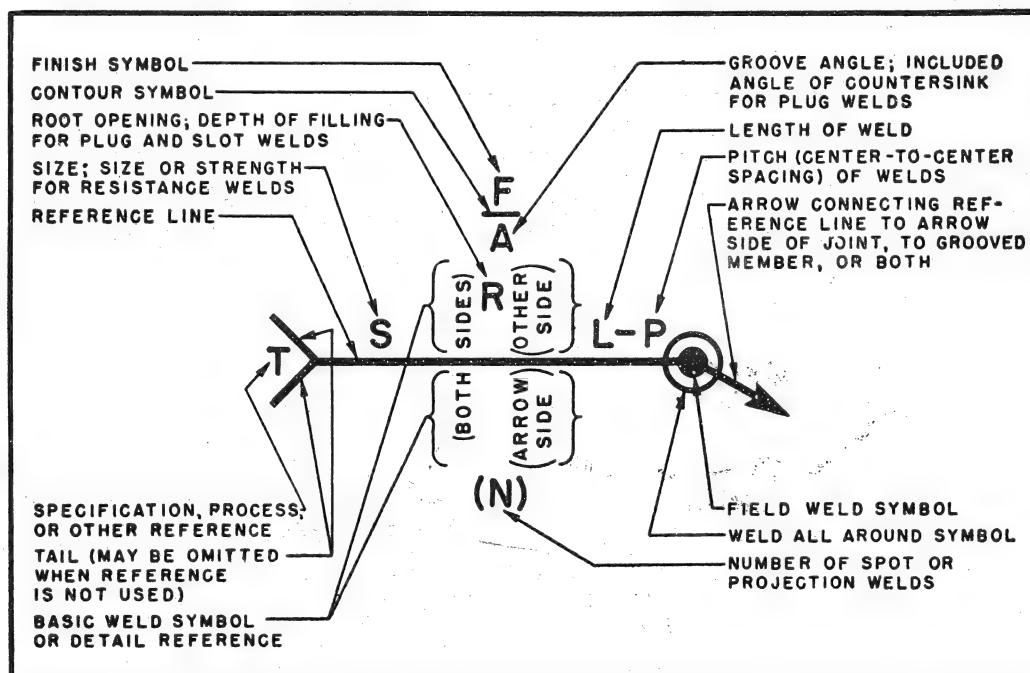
Standard Location of Elements of a Welding Symbol
